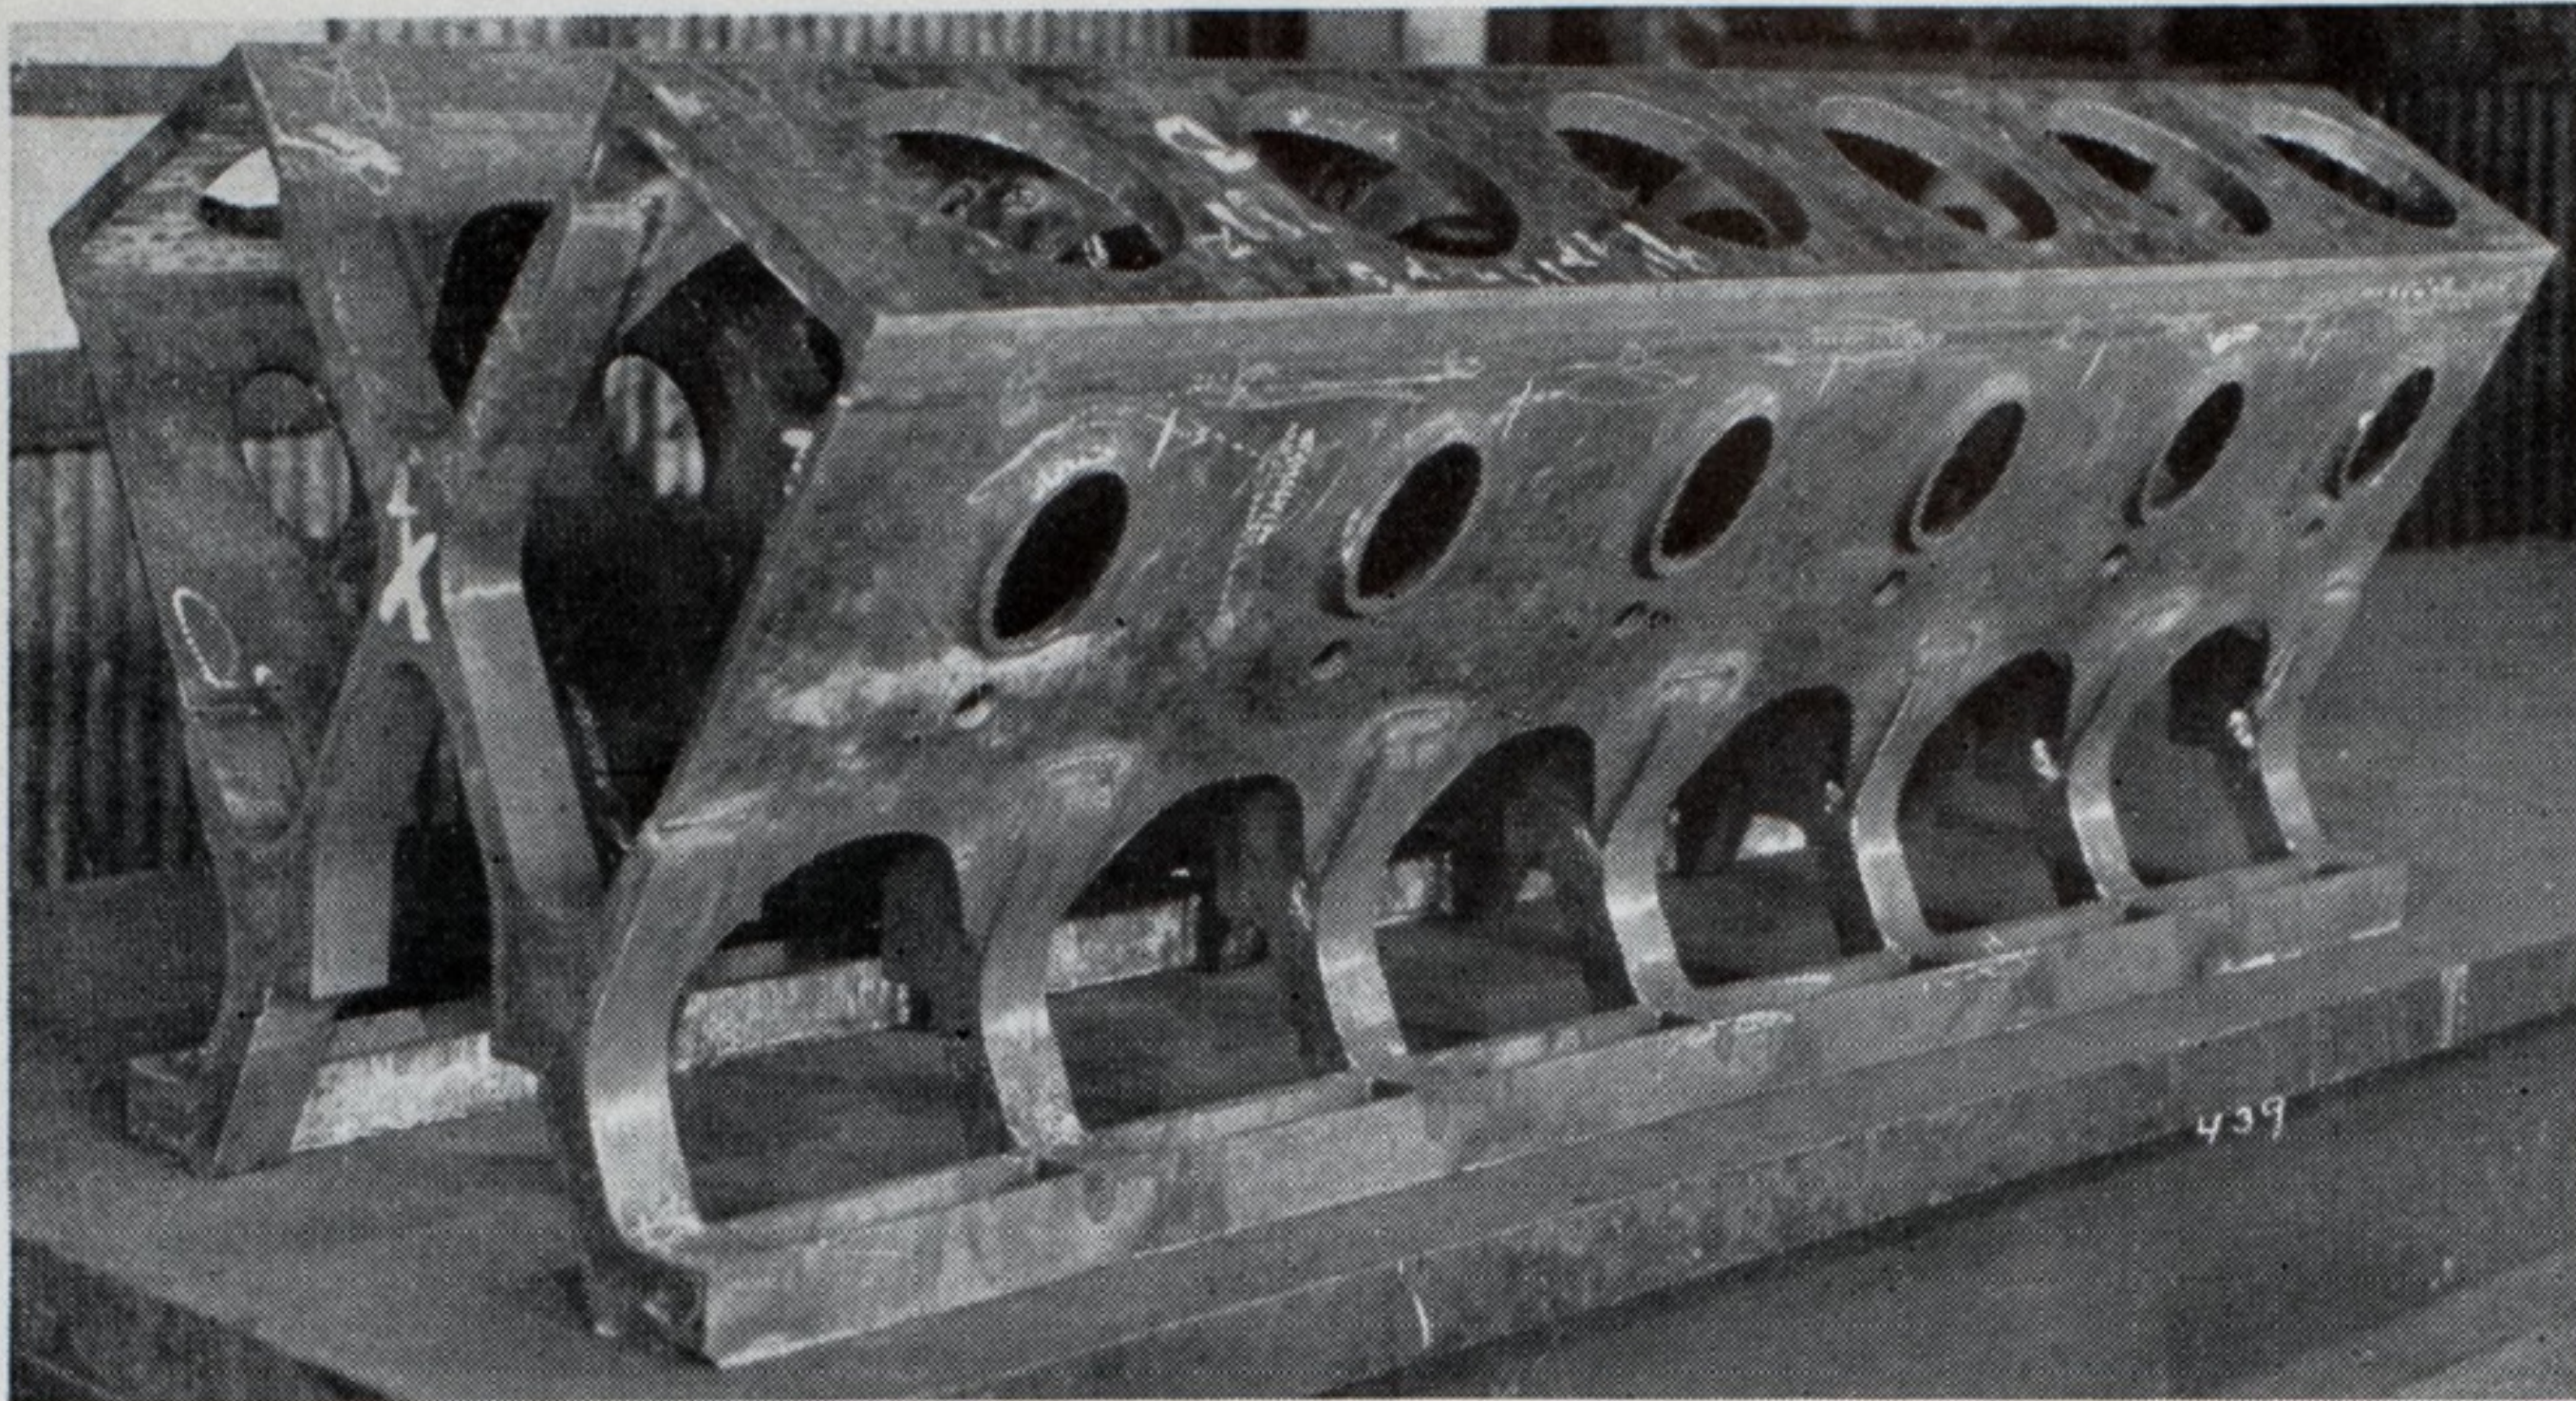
One of the early stages in the assembly of the crankcase. The top deck was welded to the transition plate with a single butt weld running the length of the engine on each side
